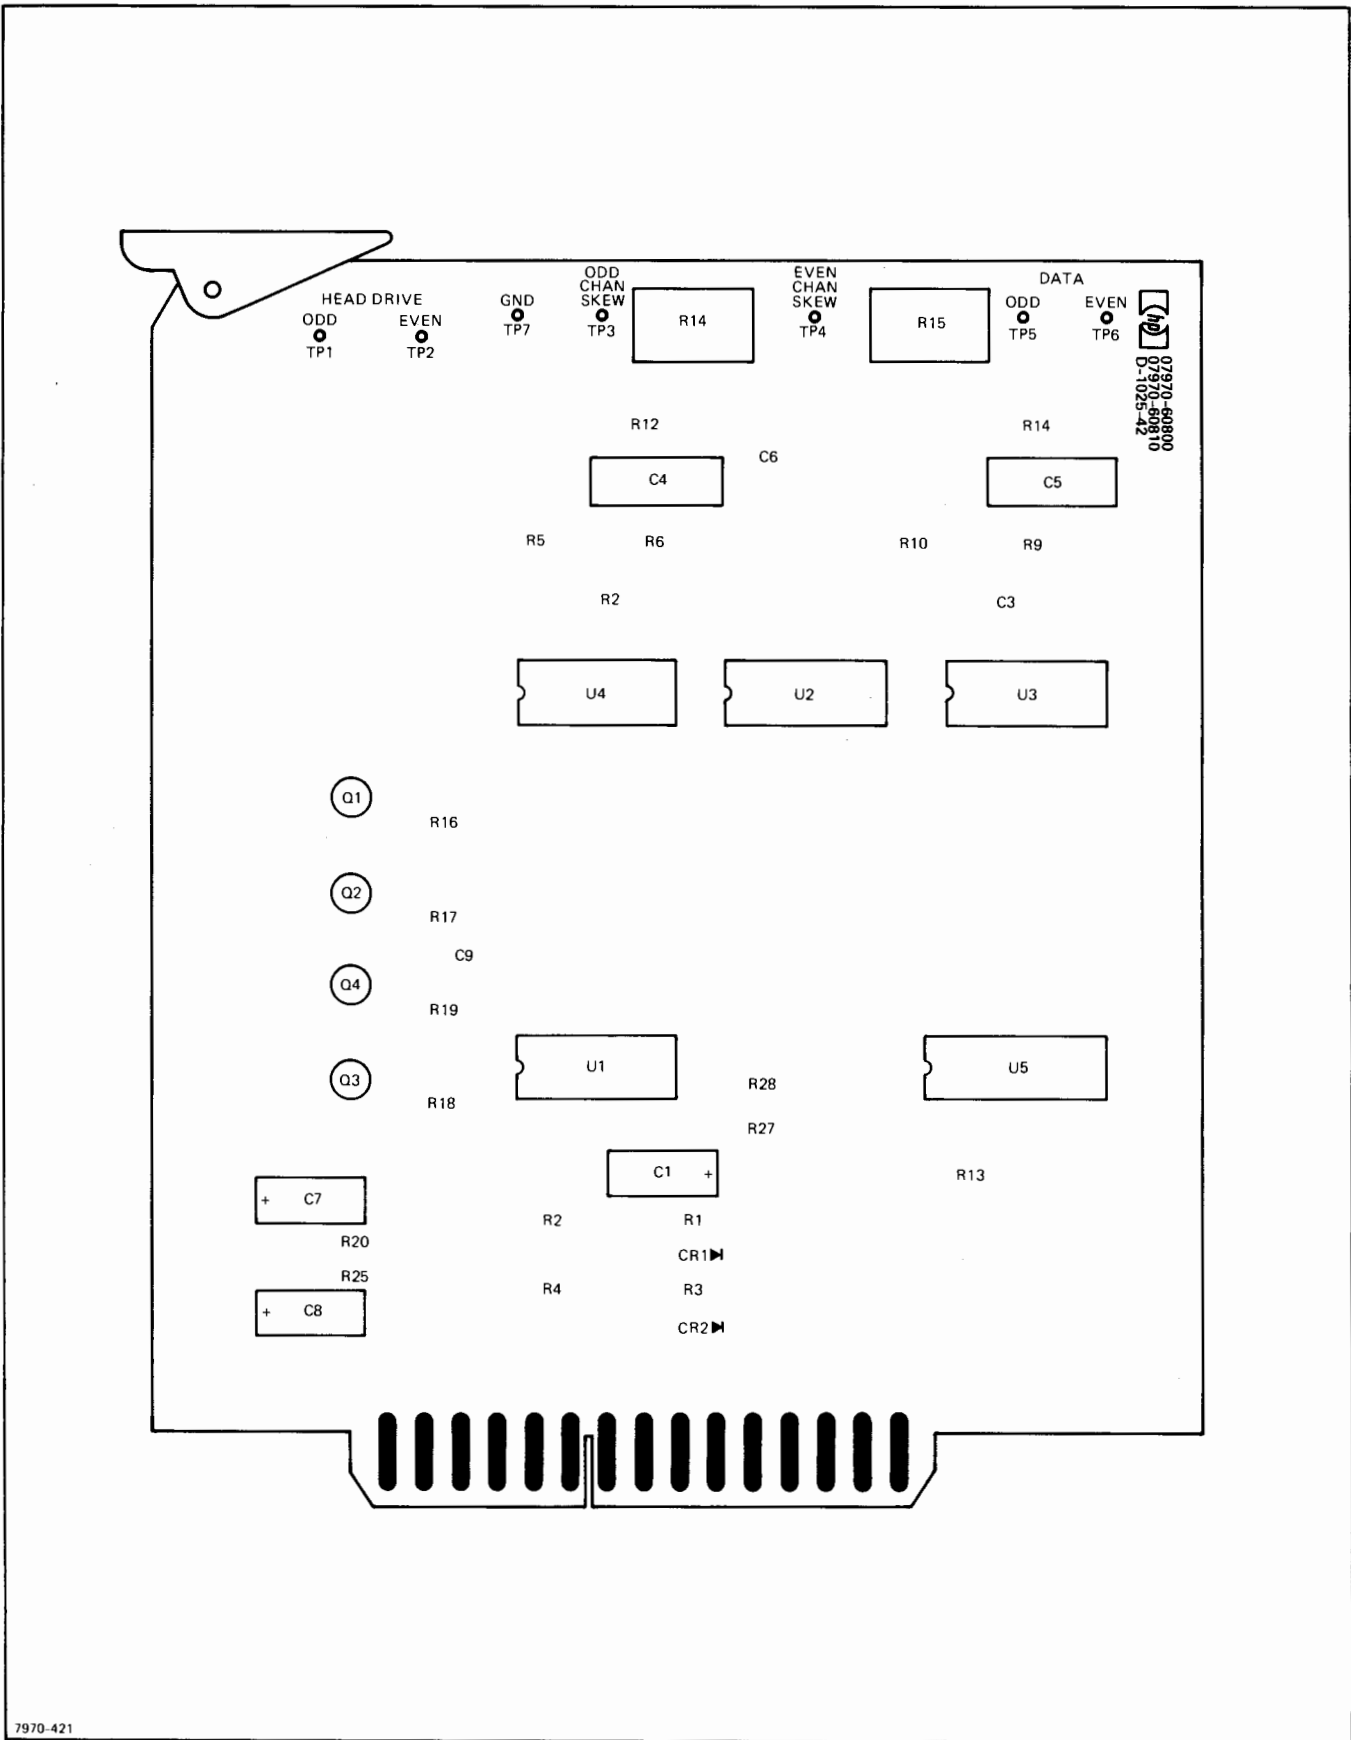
Dual-Channel Write Data PC Assembly, Parts Location Diagram
